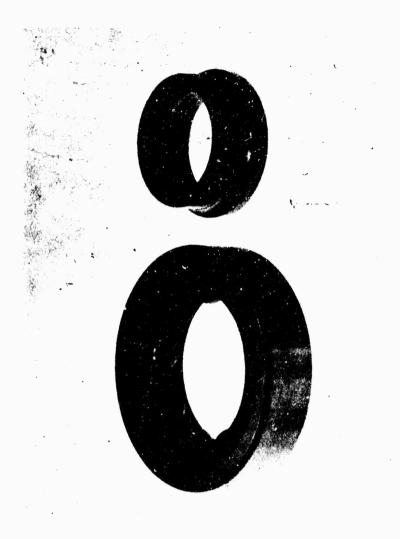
Spin-Pit Drive Turbine Lower Bearing After Attempted Proof Spin of Impeller MF-2.
